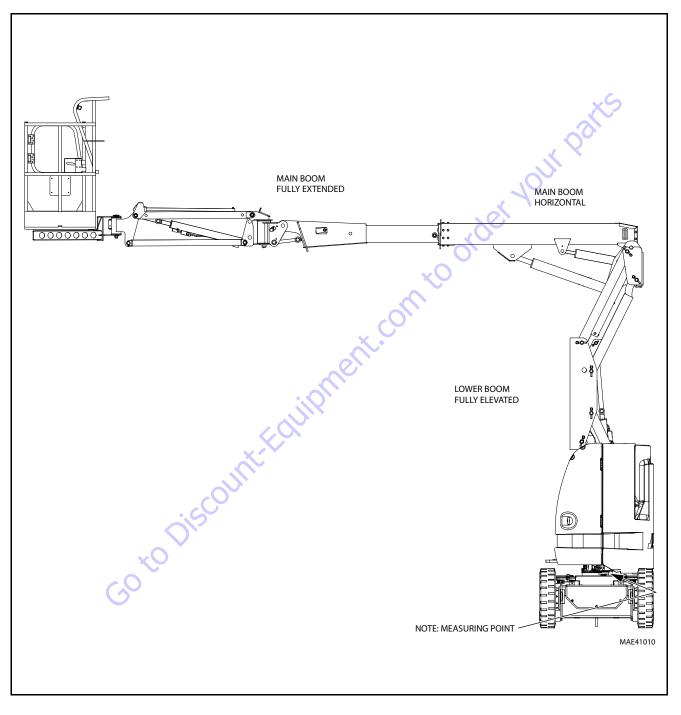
Swing Bearing Tolerance Boom Placement
